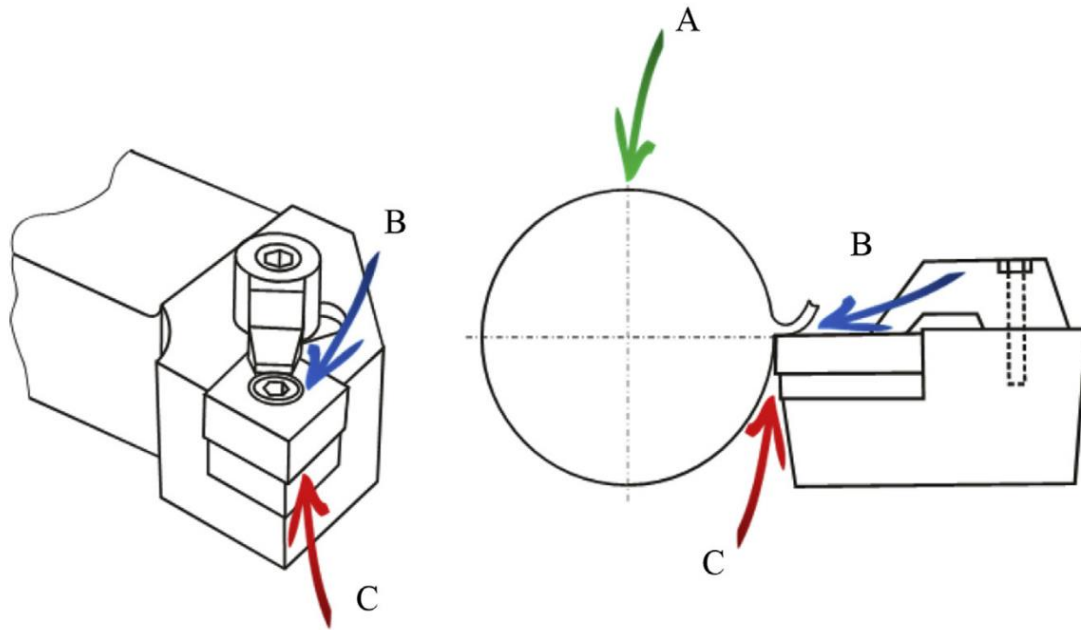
Delivery directions in cryogenic machining: workpiece cooling (A), rake face cooling (B) and flank face cooling (C) [5]
